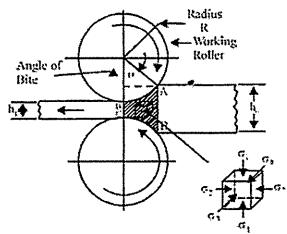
The deformation zone, state of stress, and angle of contact on rolling.
